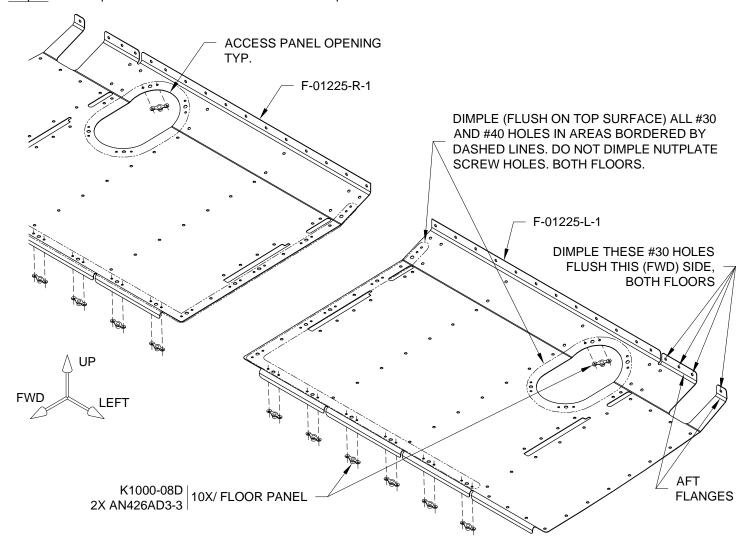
ATTACHING NUTPLATES TO F-01225L-1 & -R-1
